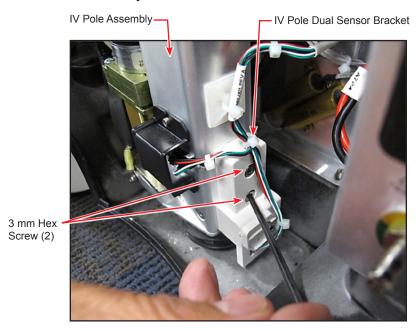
IV Pole Dual Sensor Bracket Removal
